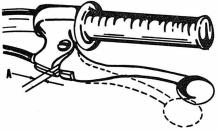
The clutch hand lever free play should be measured at (A).
